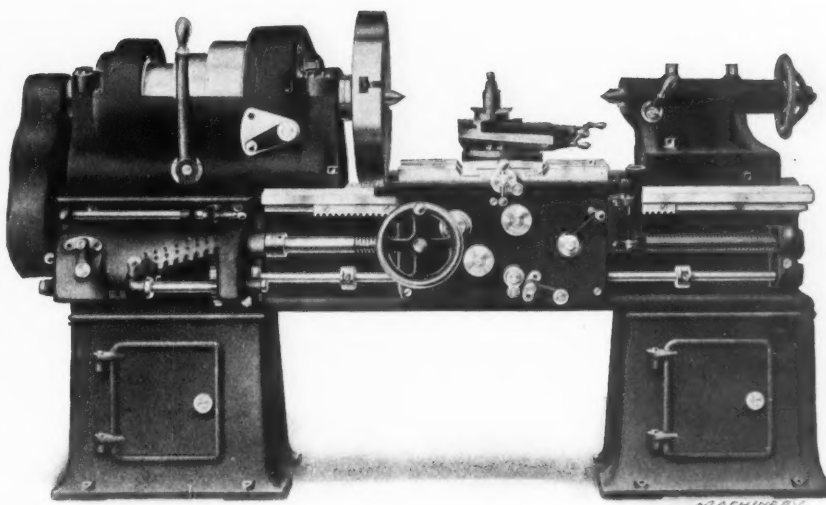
Rahn 18-inch Engine Lathe equipped with Three-step Cone Pulley and Double Back-gears
